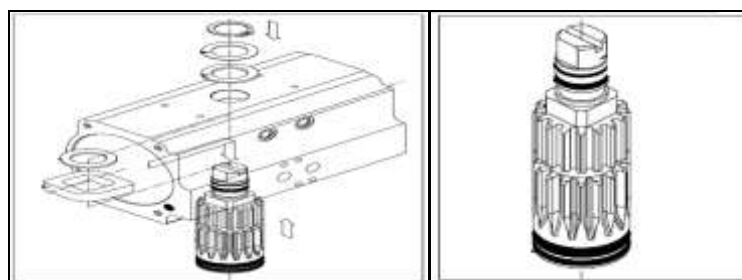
Disassembly of Pneumatic Rotary Actuator
